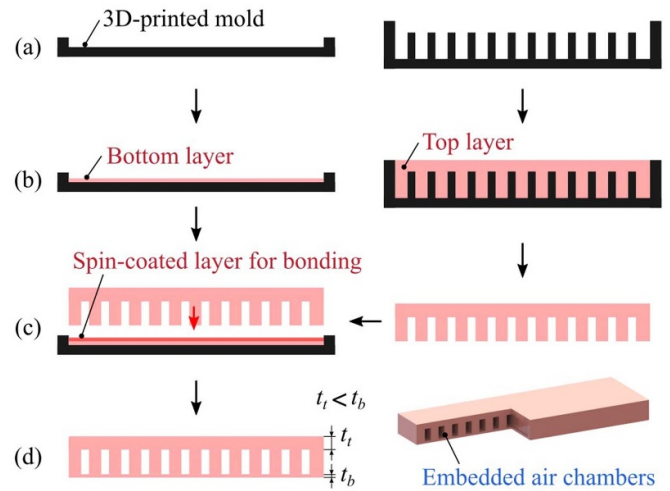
Fabrication process. (a) Design and fabricate the 3D-printed molds. (b) Pour uncured silicone elastomer into the molds and cure them. (c) Attach the top silicone layer already cured on the spin-coated bottom layer. (d) Completed structure with embedded air chambers.
